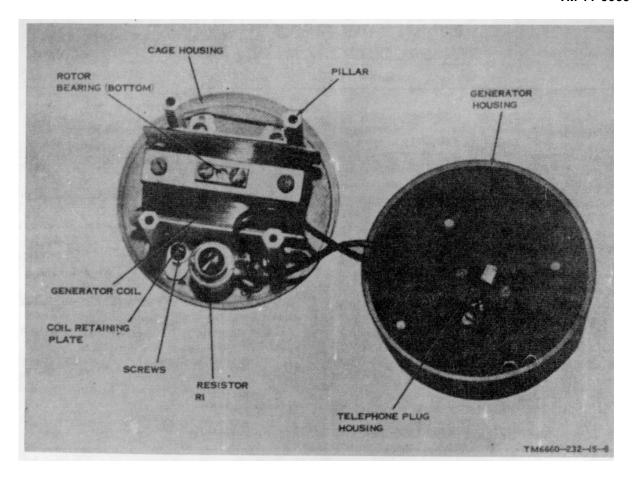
Windspeed Transmitter, Partial Disassembly.
